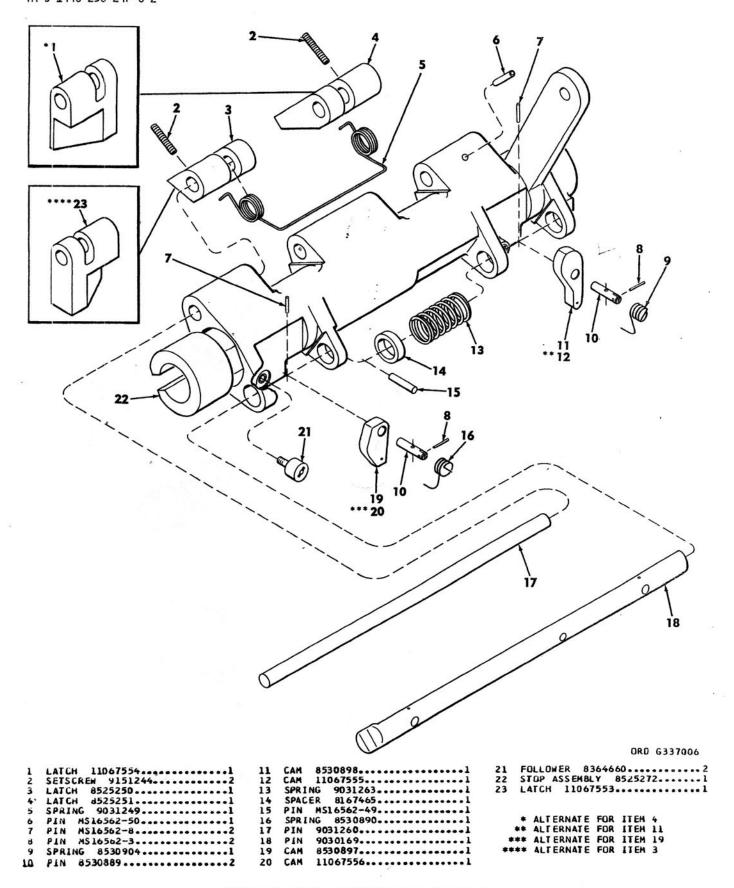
BRAKE, LAUNCHING RAIL /8525285/ /SEE FIGURE 9 FOR NEXT HIGHER ASSEMBLY/
